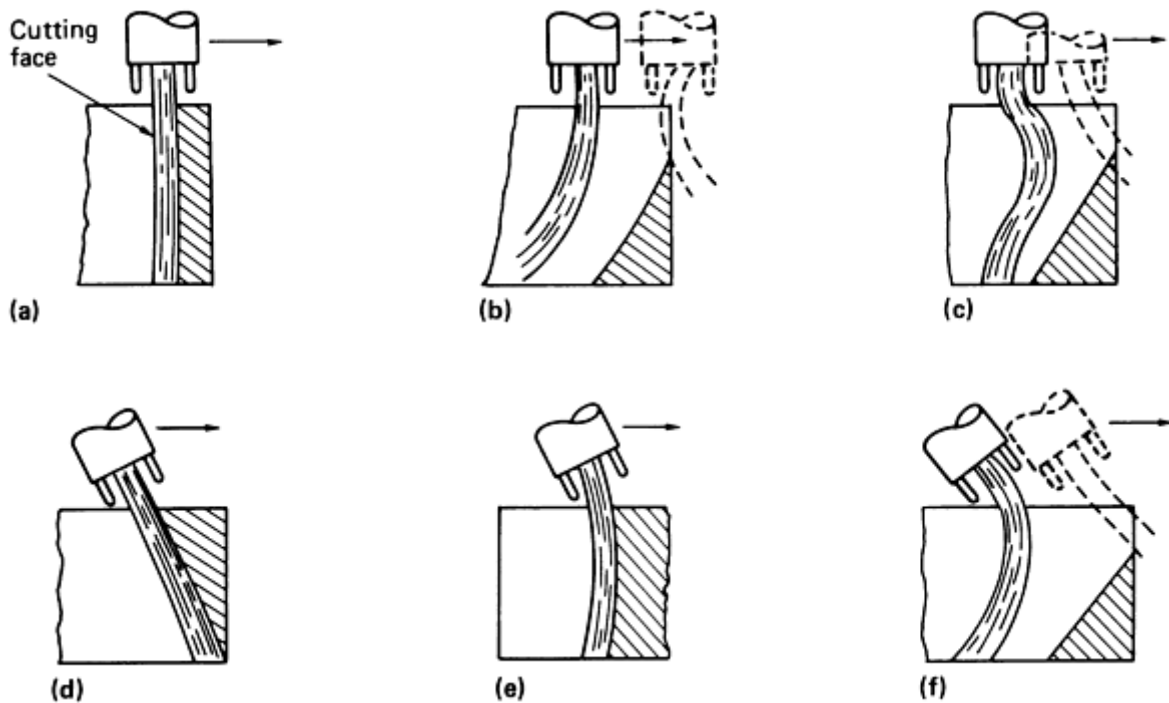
PROPER AND IMPROPER TECHNIQUES FOR A HEAVY CUT. (A) MINIMUM DRAG (TYPICAL AT BALANCED CONDITIONS) PERMITS FLAME TO BREAK THROUGH CUTTING FACE UNIFORMLY AT ALL POINTS. (B) EXCESSIVE DRAG, TYPICALLY CAUSED BY INSUFFICIENT OXYGEN OR EXCESSIVE SPEED, RESULTS IN UNDERCUT. (C) FORWARD DRAG RESULTING FROM EXCESSIVE OXYGEN PRESSURE OR TOO LITTLE SPEED. (D) AND (E) FORWARD ANGLING OF TORCH TO MINIMIZE DRAG AND THUS AVOID AN UNCUT CORNER. (F) EXCESSIVE FORWARD ANGLING OF TORCH, RESULTING IN UNDERCUT
